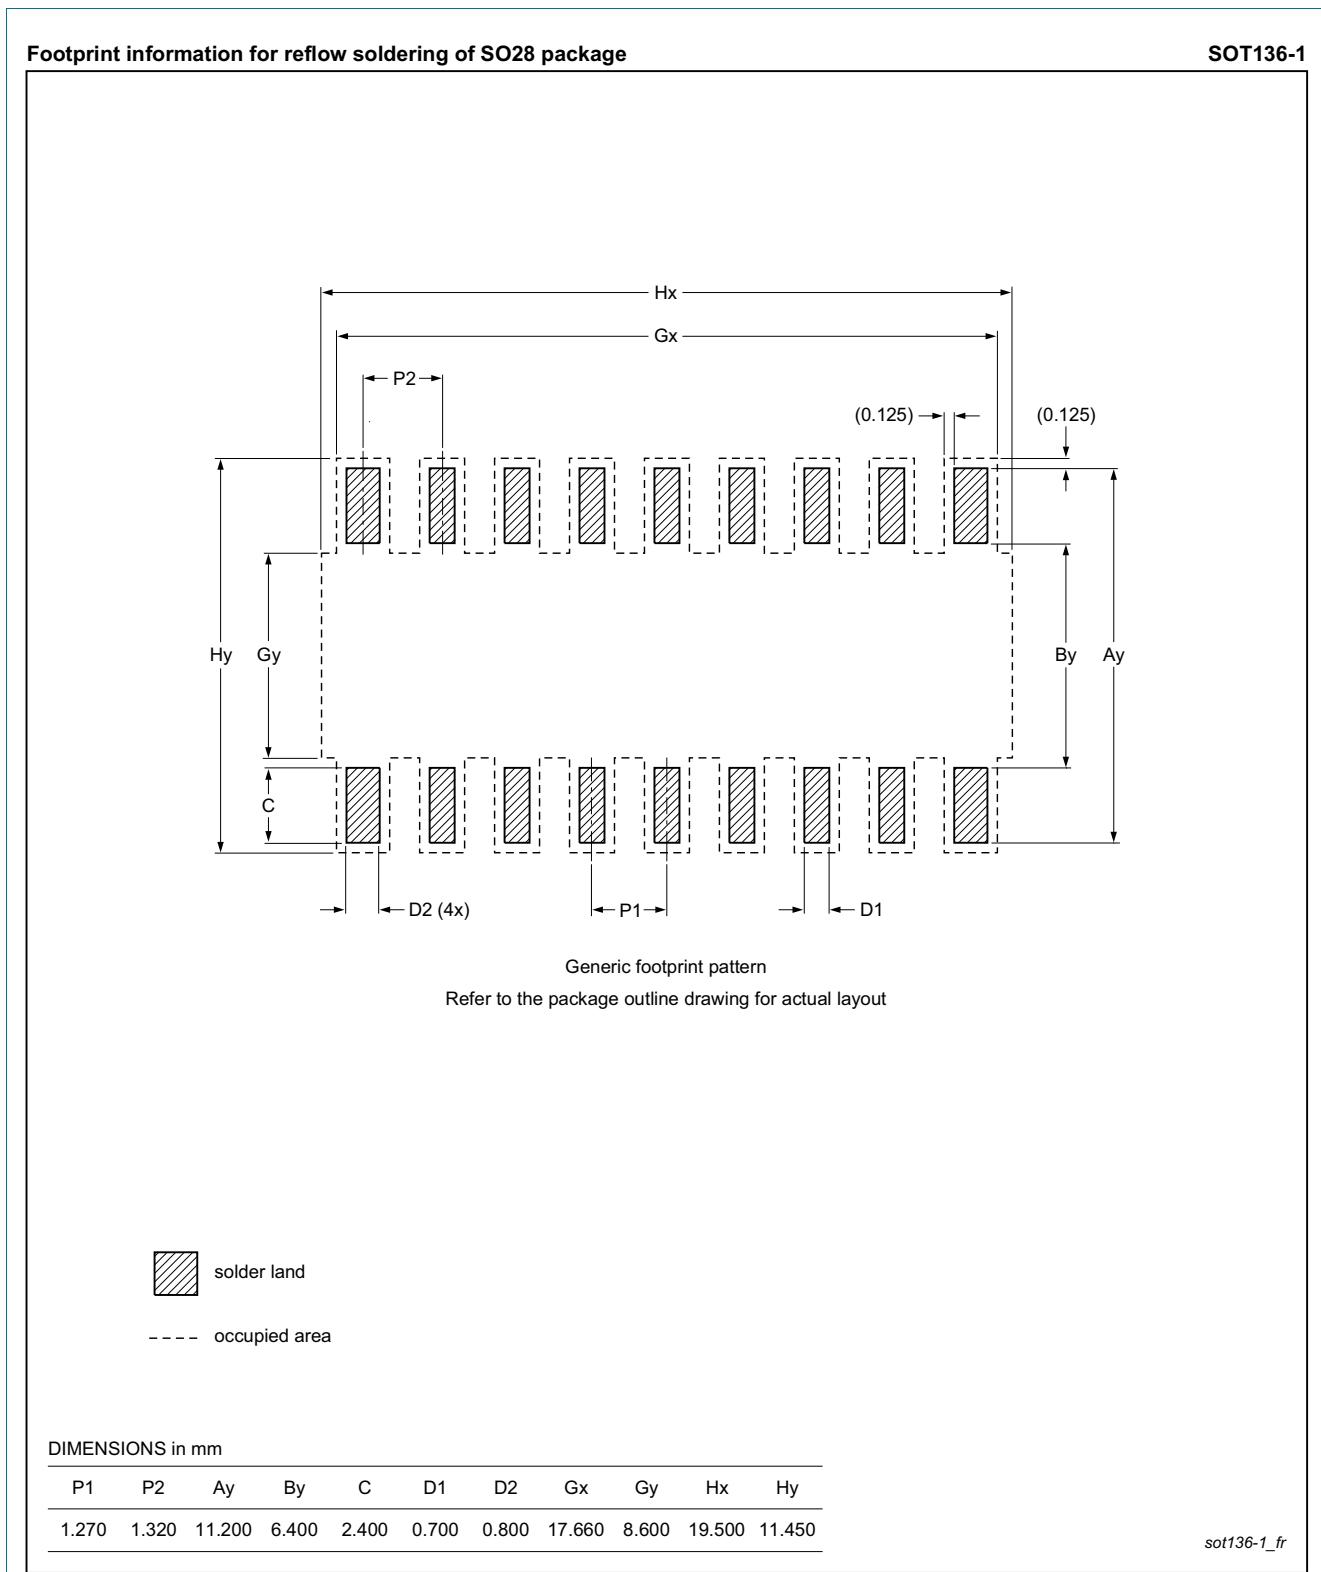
Footprint information for reflow soldering of SOT136-1 (SO28) of PCF1179CT
